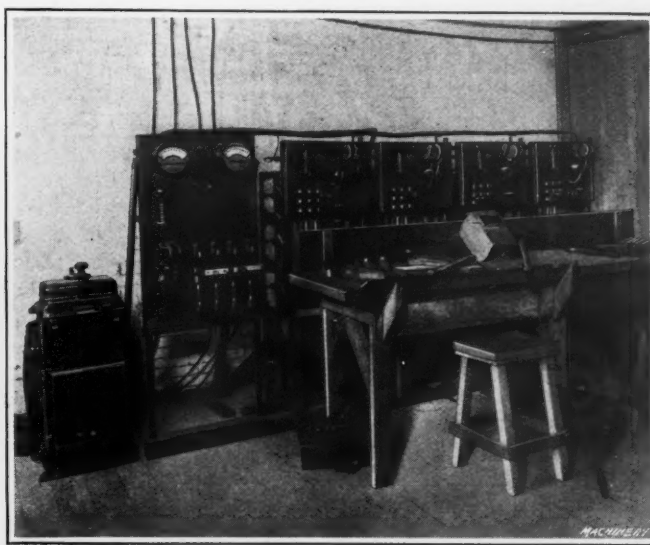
Electrical Equipment for welding Stellite Bits to Steel Holders
